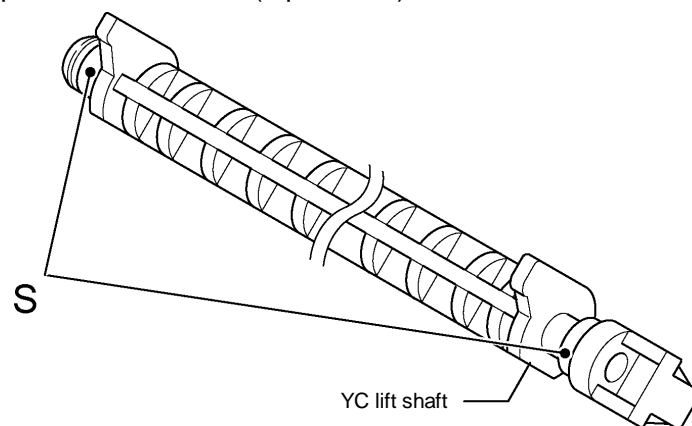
Engaged Parts of YC Lift Shaft
